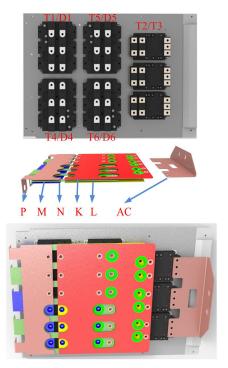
Device layouts and busbar of hybrid-SiC three-level converter
